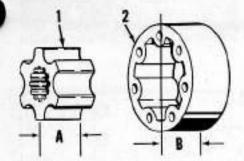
Measure thickness of rotor (A) and stator (B) as shown. If rotor (A) is 0.0508 mm (0.002 loch) less than stator (B), replace complete steering raive.
